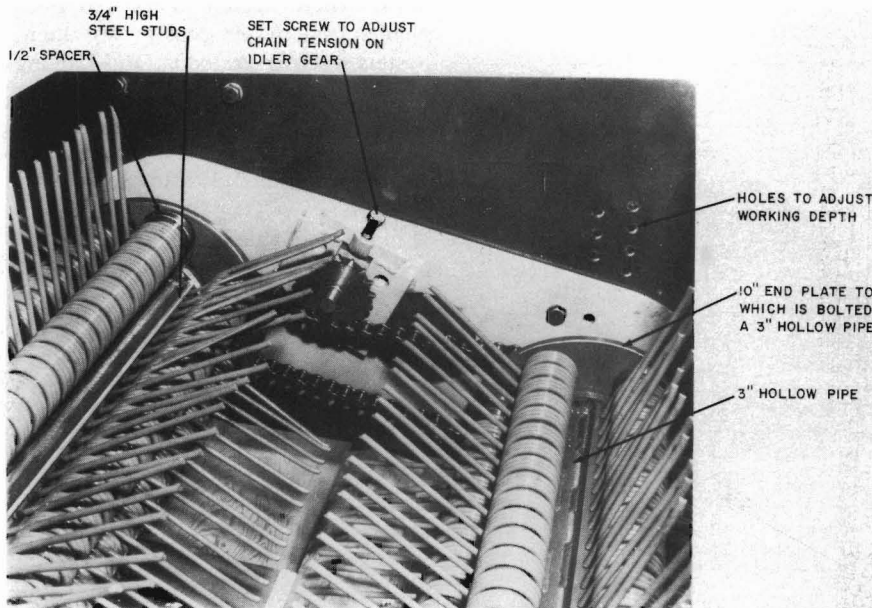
Details of the elliptical adjustable plate, idler gear, and chain drive.
